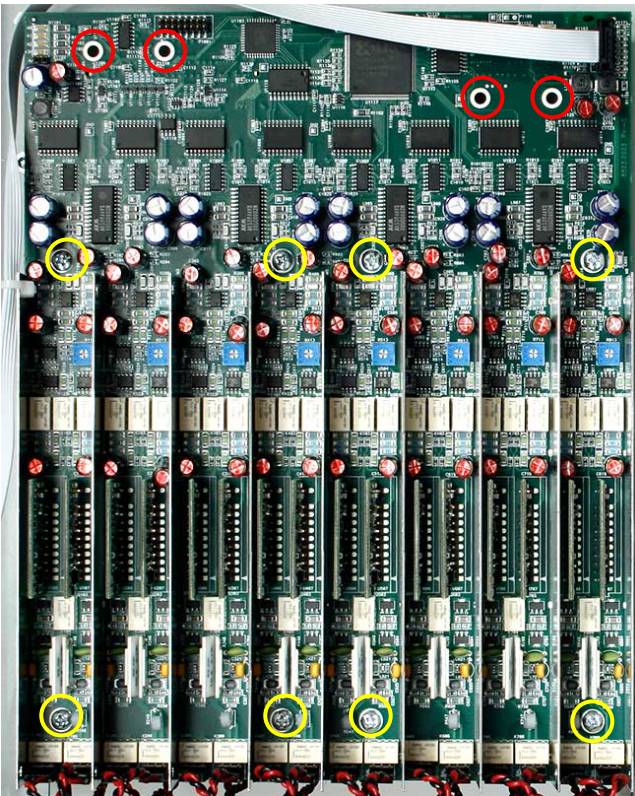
BCAS mounting screws (yellow) and removal holes (red).
